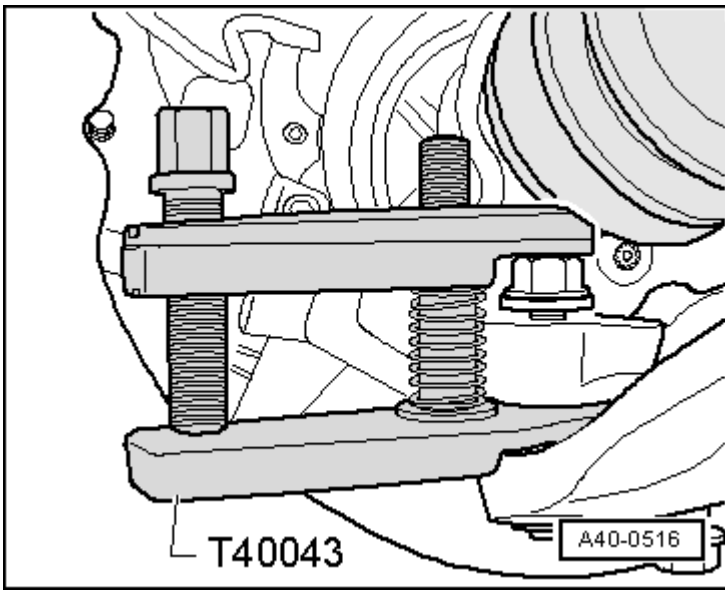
Using Ball Joint Puller T40043 Press Guide Link Ball Joint Off From Tapered Seat
